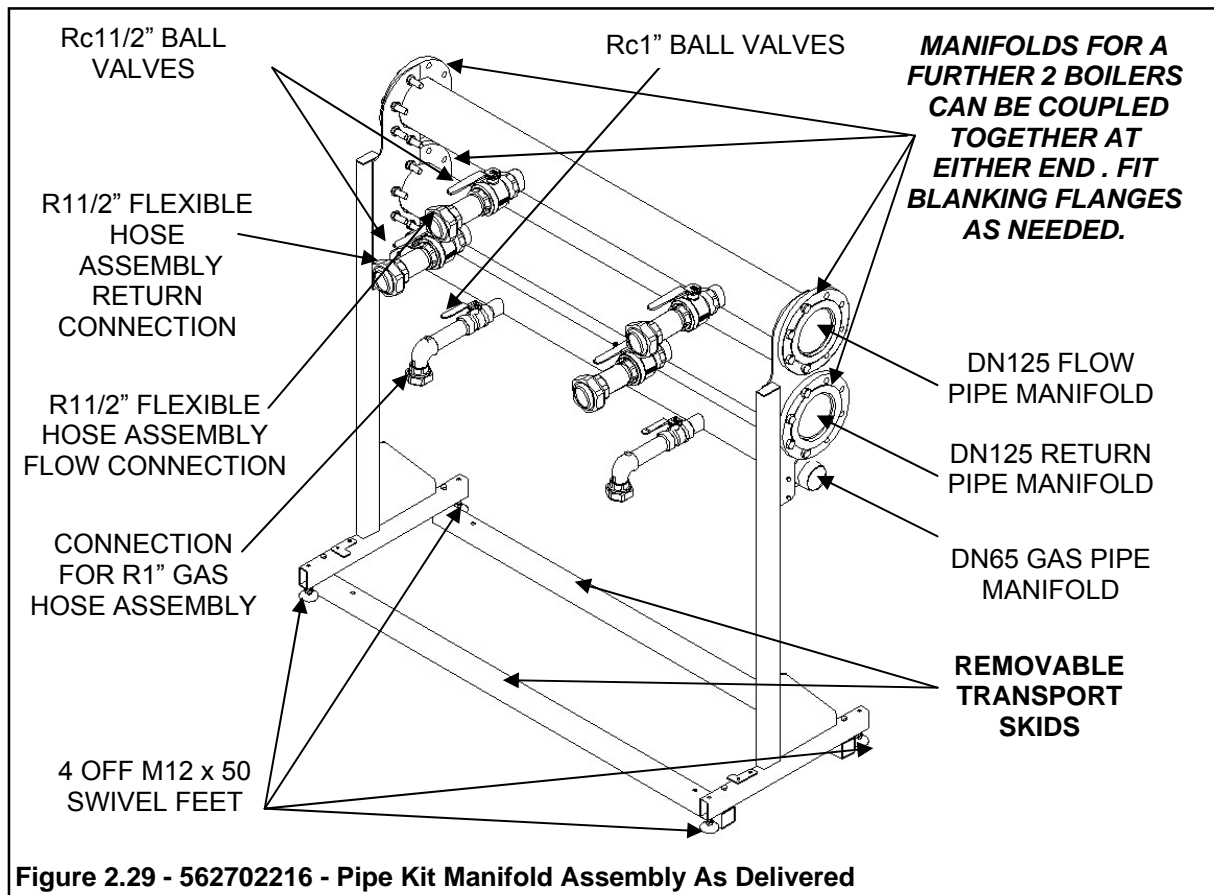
562702216 - Pipe Kit Manifold Assembly As Delivered
